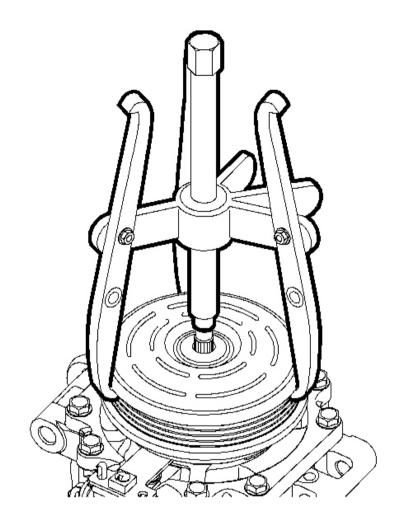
Compressor Clutch Assembly & Spacer Courtesy of GENERAL MOTORS CORP.
